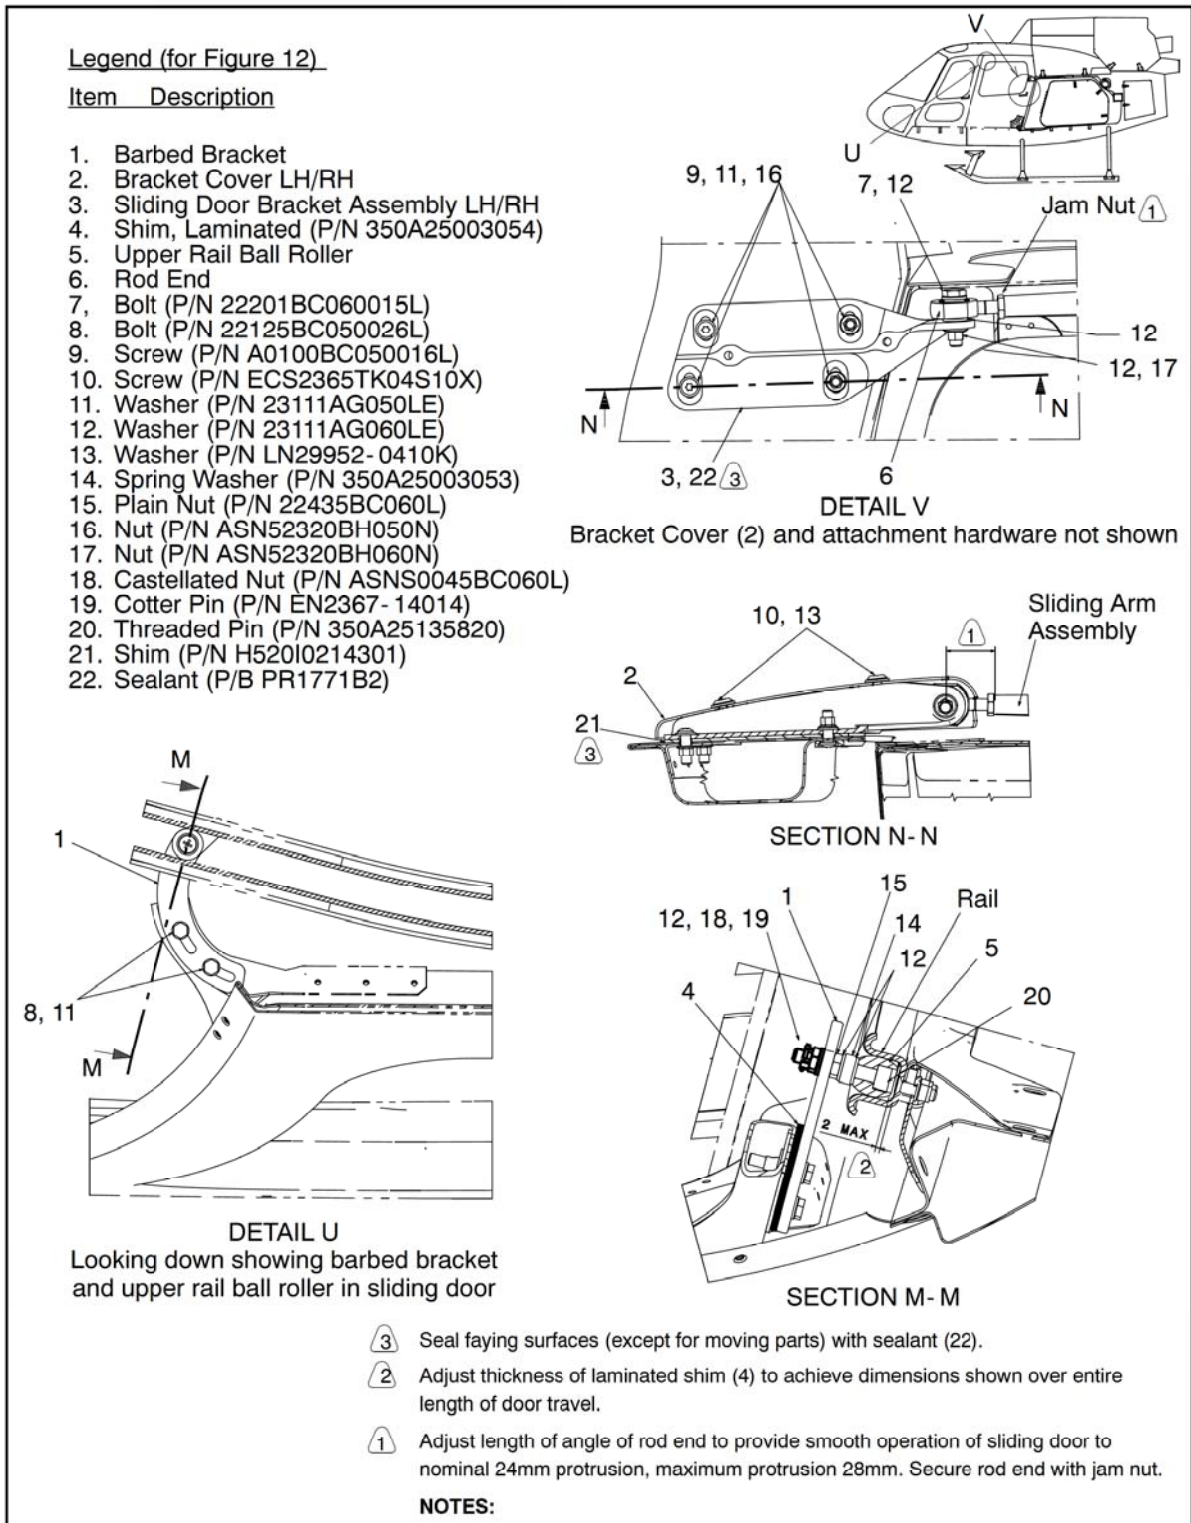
Sliding Door Installation - Sliding Door Upper Brackets
